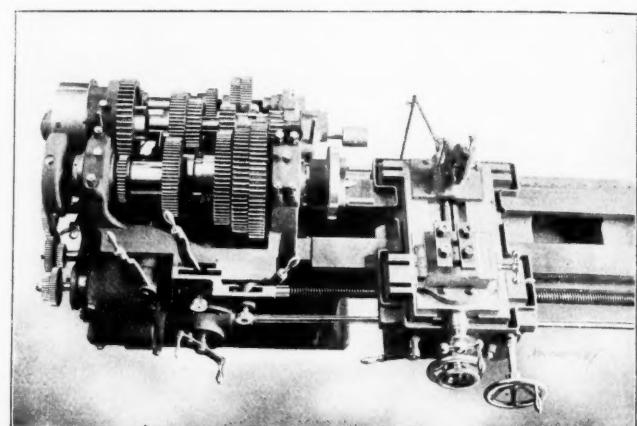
The Head-stock and Carriage of Lathe shown in Fig. 3.
